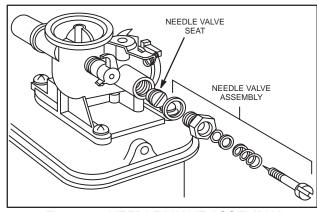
NEEDLE VALVE ASSEMBLY, SCREW-IN TYPE
